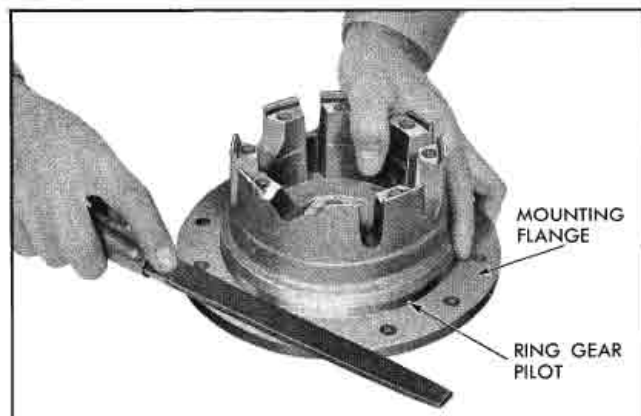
Removing Nicks and Burrs from Mounting Flange
